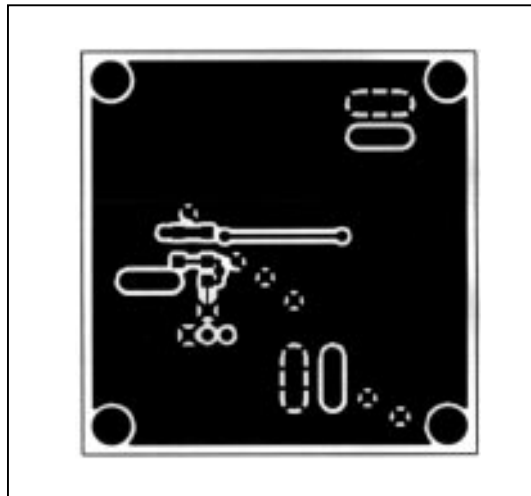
MAX608 EV Kit PC Board Layout—Solder Side
